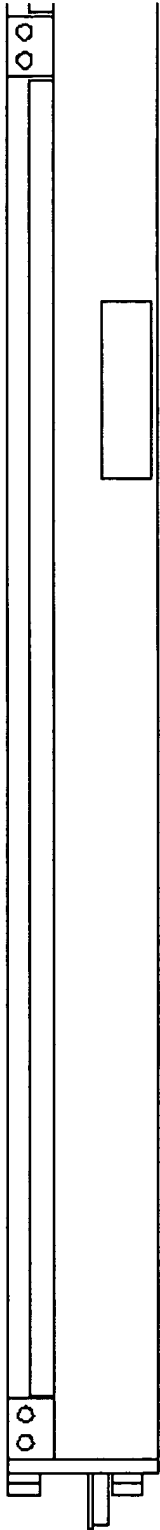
C: Front view of the right end of a floor frame (20 foot collapsible cargo container)
